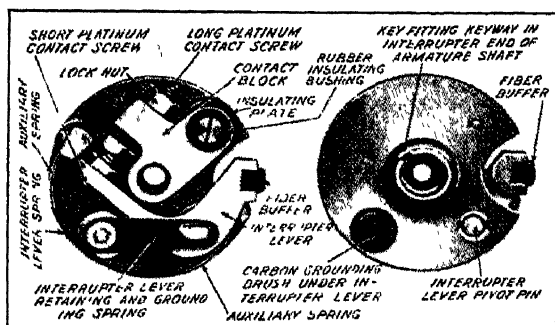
Circuit breaker for Bosch DU4 magneto. (Left) front view, (right) back view.
